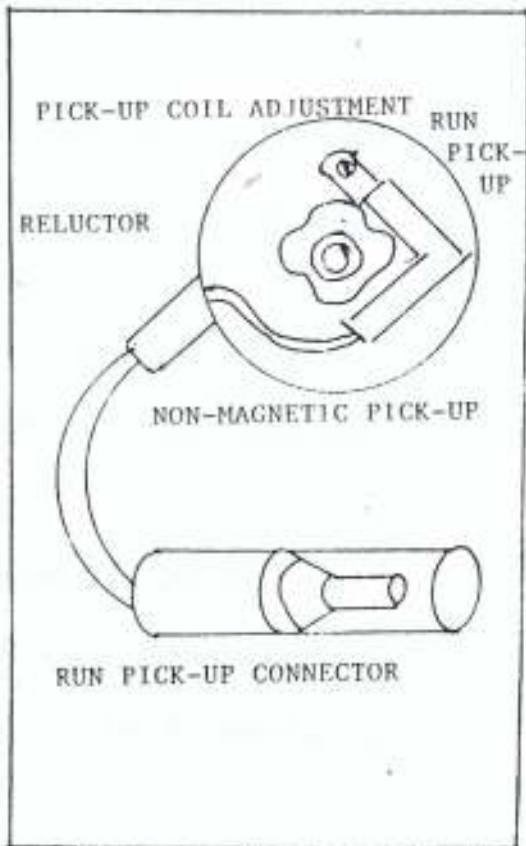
SPEED SENSOR FOR DISTRIBUTOR SHAFT
